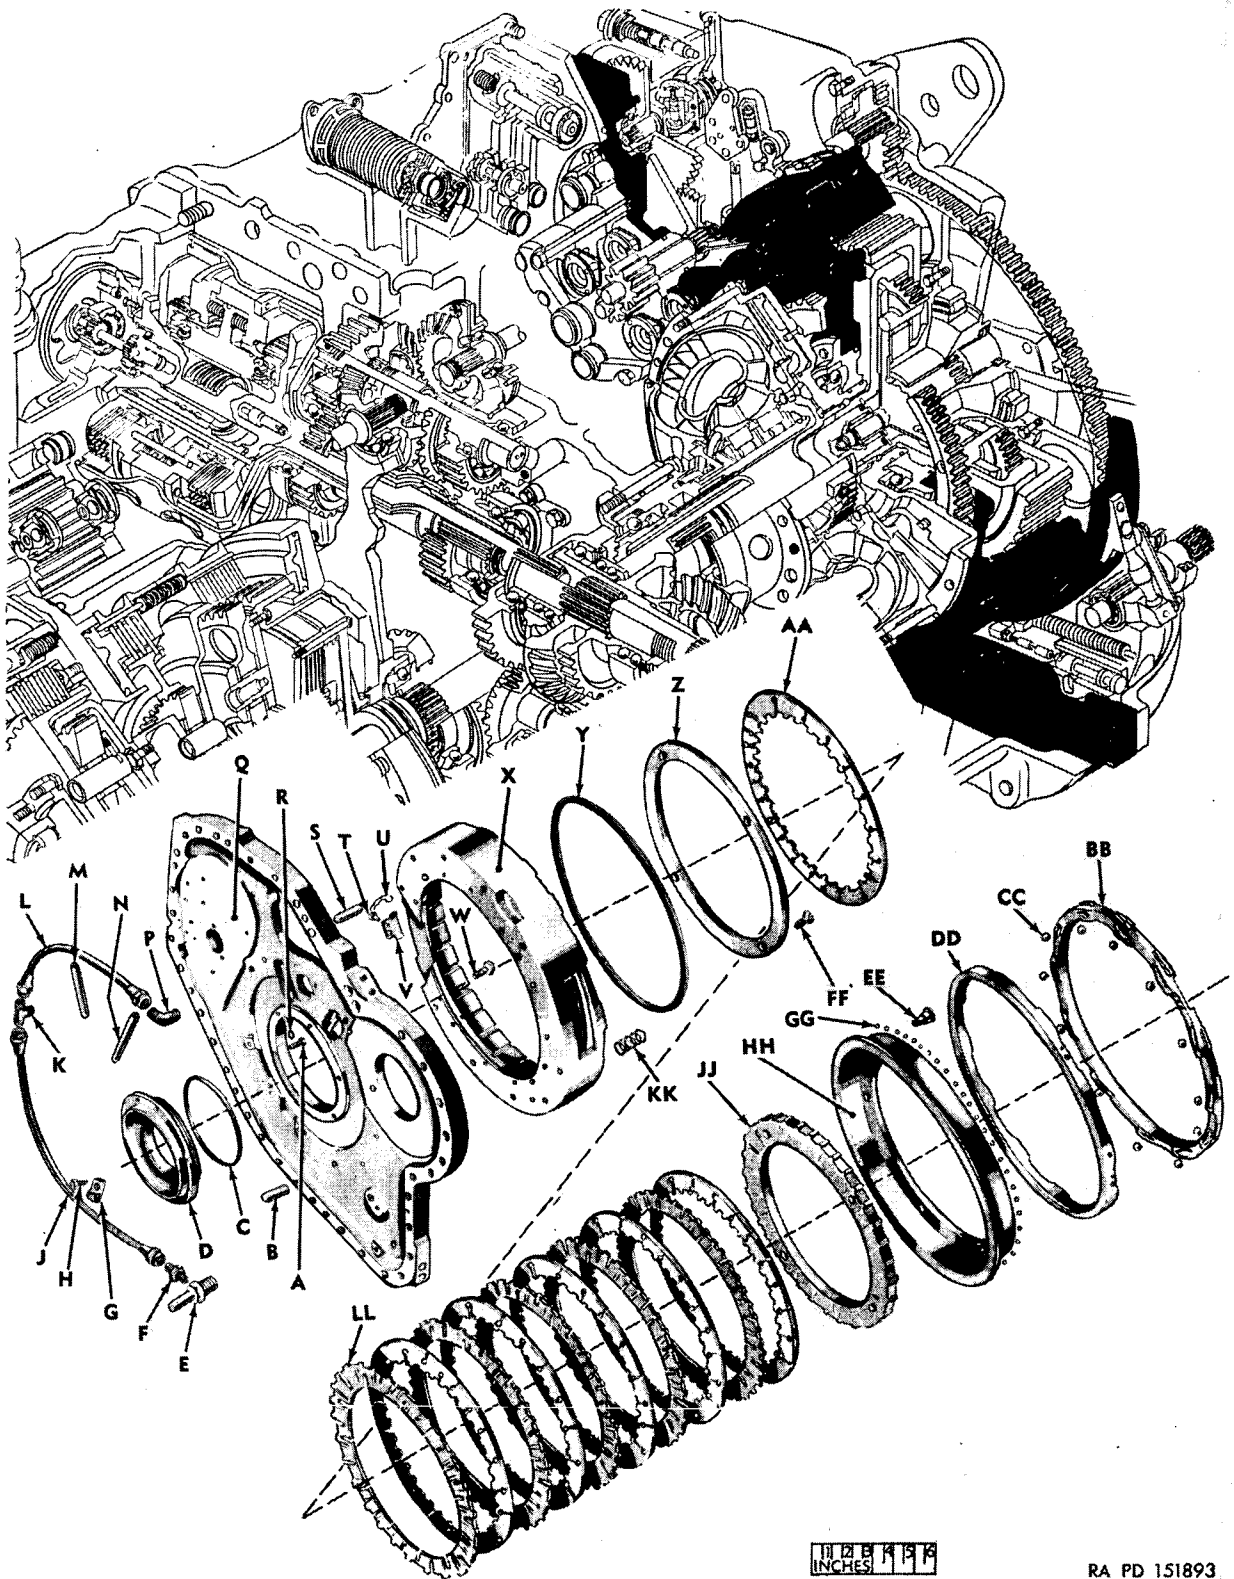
Left end plate, brake anchor, and brake disk assemblies—exploded view.
